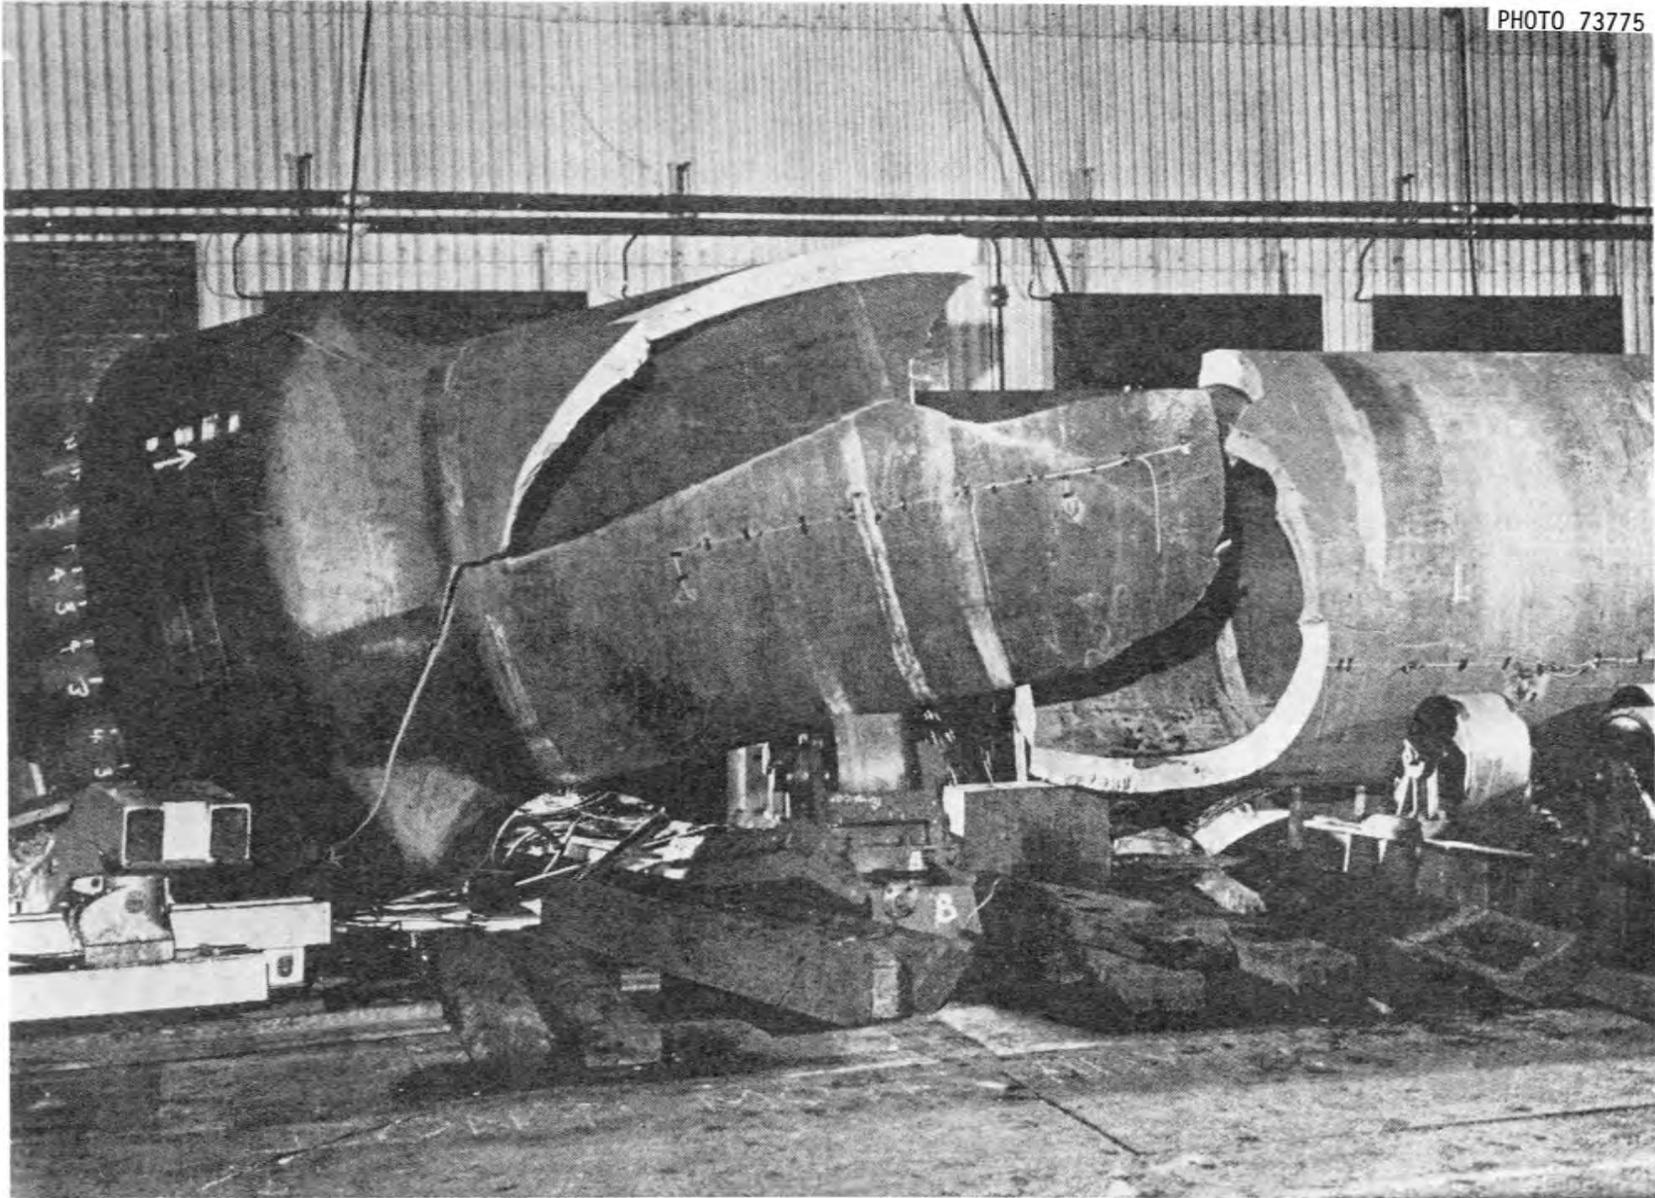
Vessel that failed during hydrostatic testing. Source: R. Weck, "Brittle Fracture of a Thick-Walled Pressure Vessel," *Br. Weld. Res. Assoc. Bull* 7(6)(June 1966), Fig. 12. Reprinted by permission.
